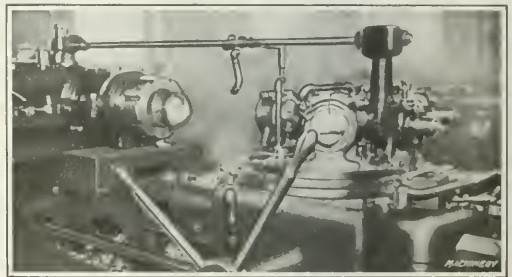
Boring out Closed End of Shell for Gas Plug and threading
